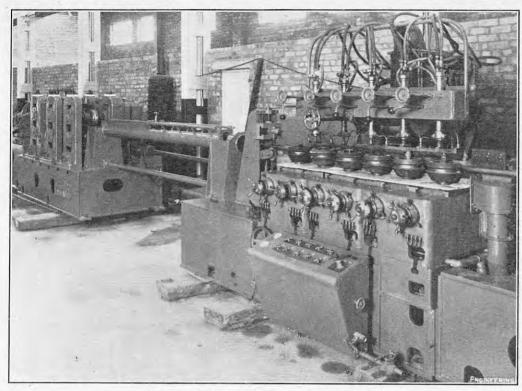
WELDING HEAD AND SIZING ROLLS.
